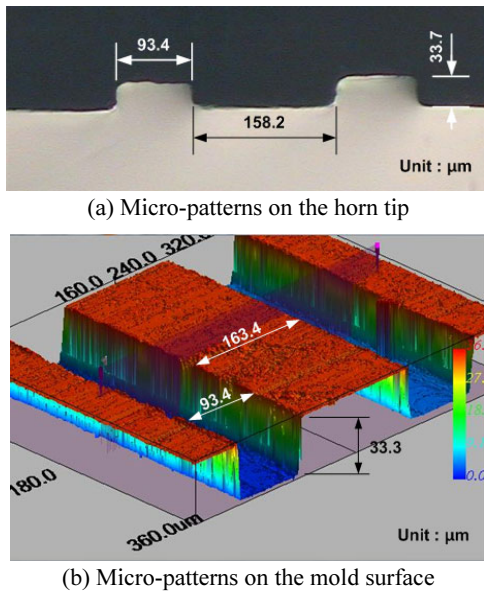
Dimensions of the micro-patterns on the tool horn and the mold surface
